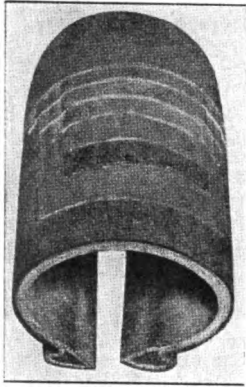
SHOWING HOW THE BUILT UP TREAD IS STEPPED
